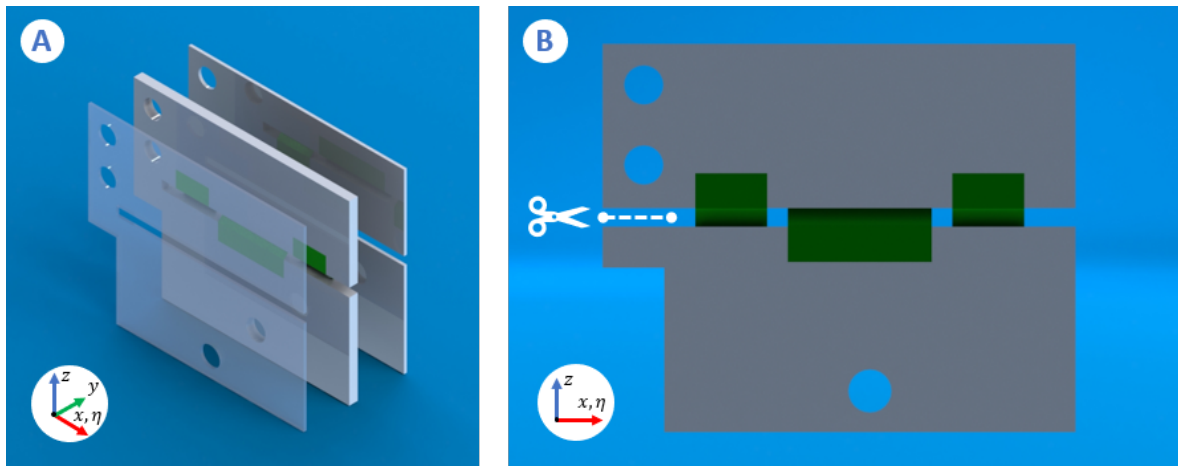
Hinge holder assembly used for measuring the angular pitching stiffness of the hinge. A: exploded view of the assembly with the first carbon plate made transparent. The leaf flexures are coloured green for better visibility. The assembly consists of five carbon plates glued together: the middle three give the flexures the right configuration, the outside two keep the flexures in place. B: side view of the assembly. The tab connecting the top and bottom parts together, is cut away (white, dashed line). The top two holes are used to align the plates; the bottom hole holds the rod (see fig. 4-5 and fig. 4-7).
